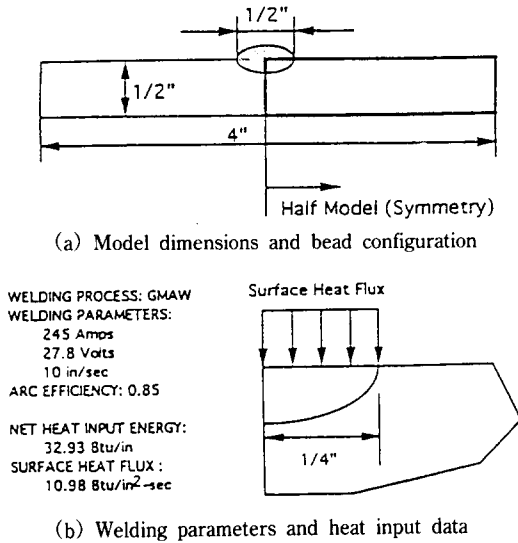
Single pass bead-on-plate weld on the 1/2" thick plate
